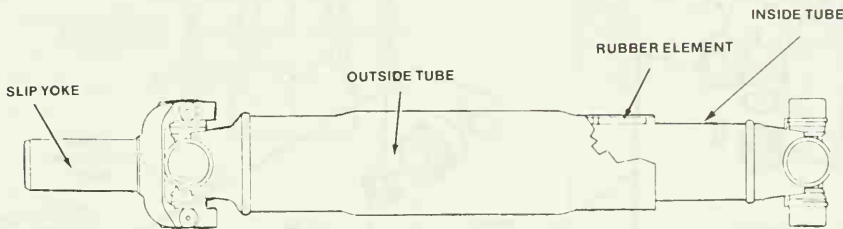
A two-piece drive shaft tube separated by a rubber element. (Buick Motor Division of General Motors Corporation)
